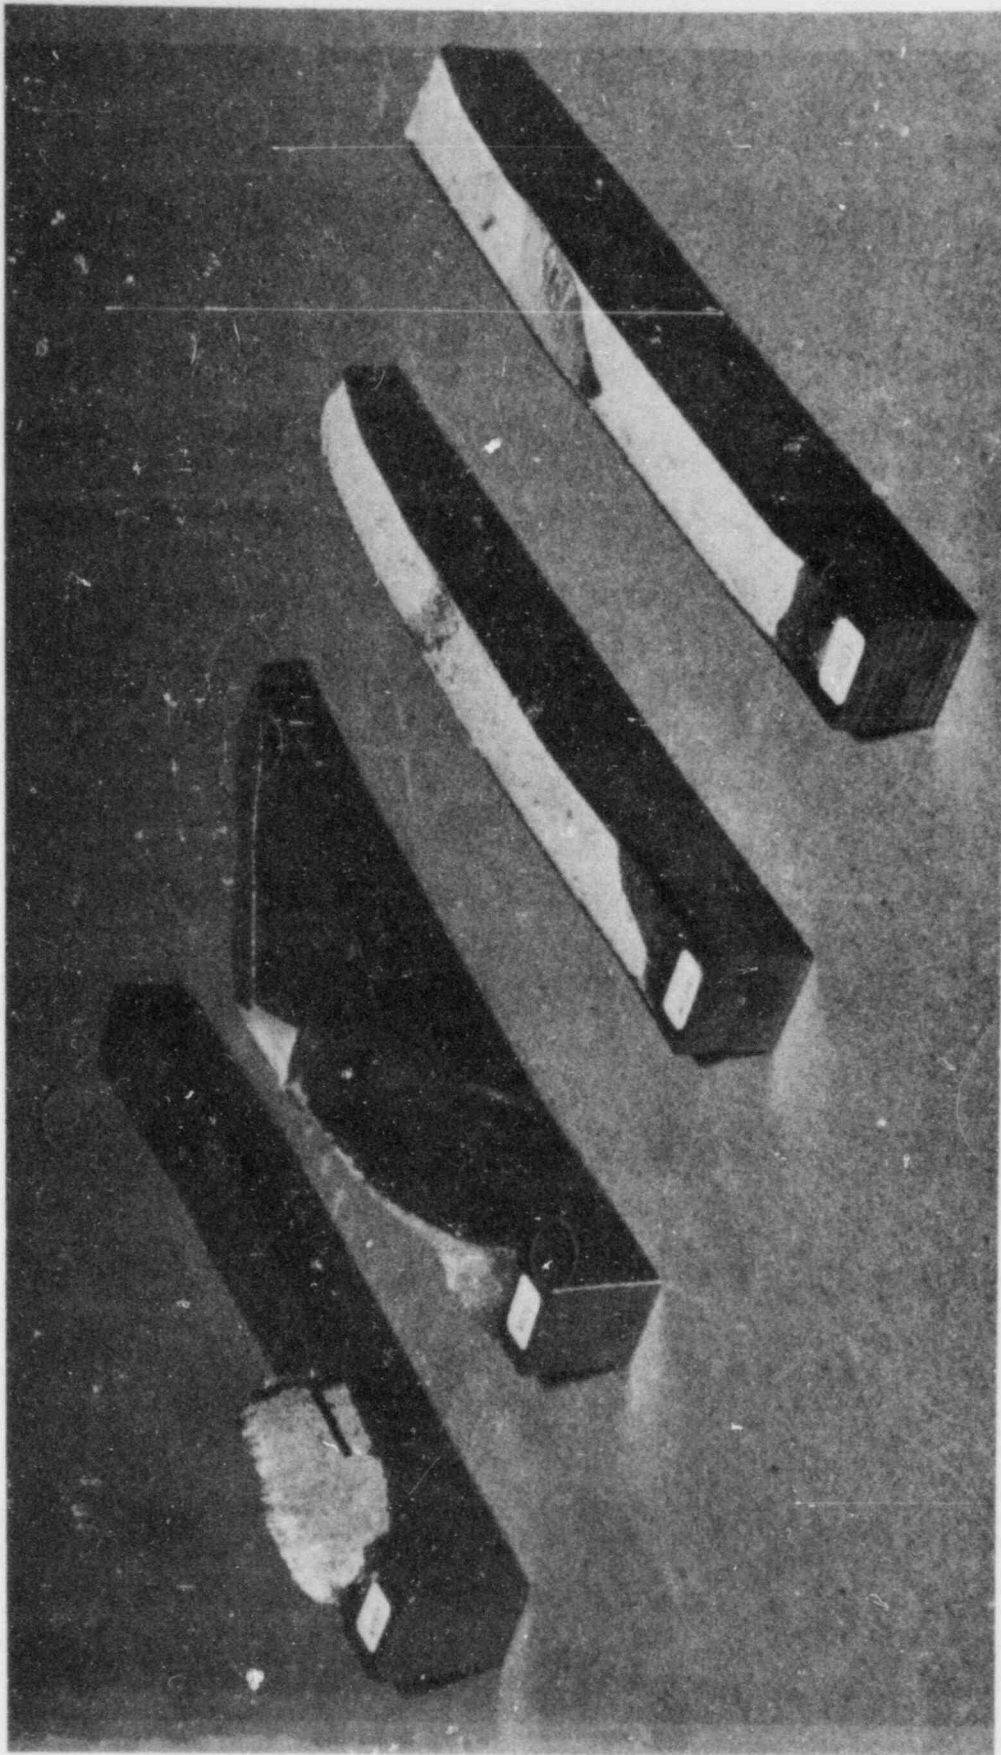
Comparison of the Fracture Surfaces of E316L and Inconel Weld Metal for Specimens Tested at 550F. Numbered Left to Right: WWS7, WSS2, WSS4, WSS1
